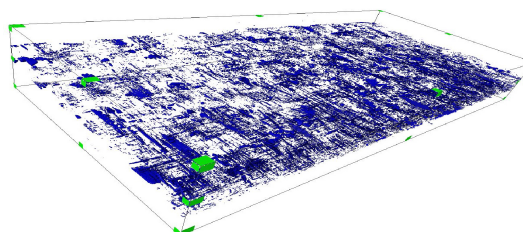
CT scan image of specimens that were continuously welded without consolidator; Vibration amplitude (peak-to-peak): 80 μm , welding force: 500 N, welding speed: 35 mm/s
